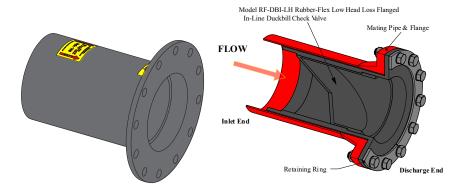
Model RF-DBI-LH Rubber-Flex Low Head Loss Flanged In-Line Duckbill Check Valve
